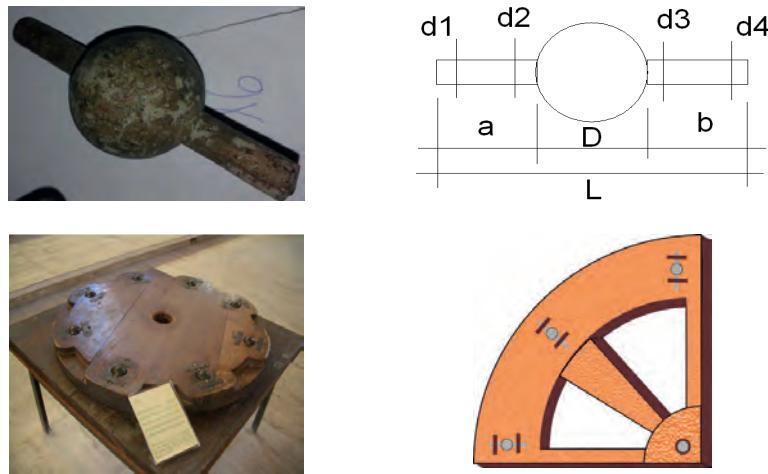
An example of mechanism design used in study of history of machines. Top, left: Roman bronze ball bearing of 1st century A.D. Top, right: a drawing model. Bottom, left: a reconstruction model of a circular platform with ball bearings. Bottom, right: a CAD design model of a circular module of a guide with ball bearings.
